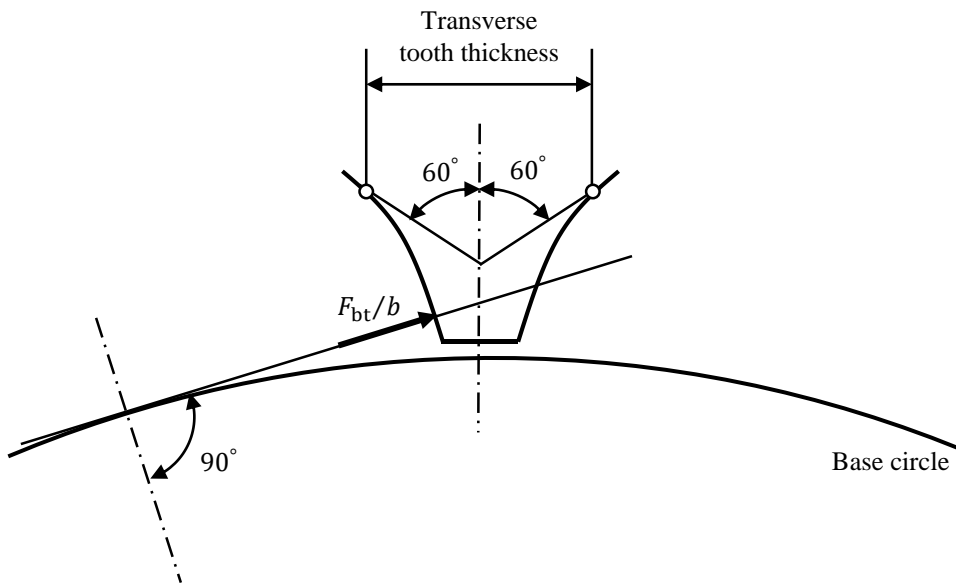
Transverse tooth thickness for calculating form factor of internal gears by ISO 6336 Method B.
